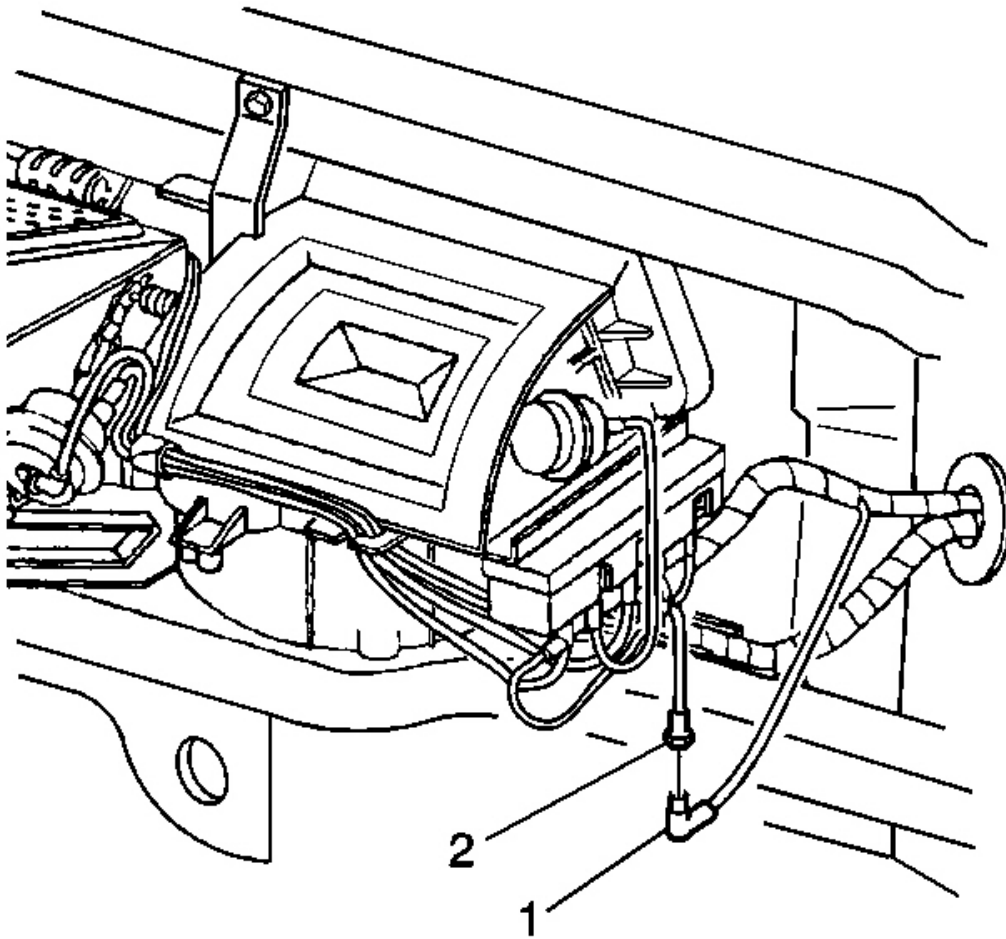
HVAC Module Vacuum Harness & I/P Harness Vacuum Supply Line
